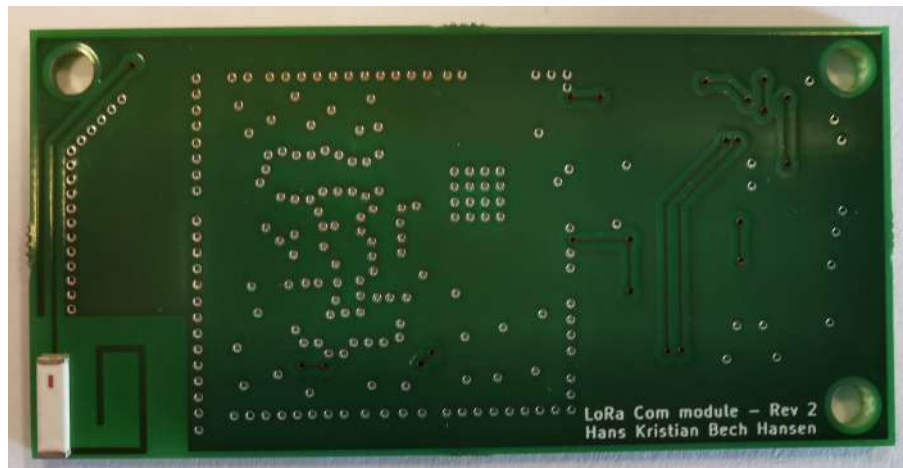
The antenna configuration of Design 2, with the antenna mounted on the back of the PCB
